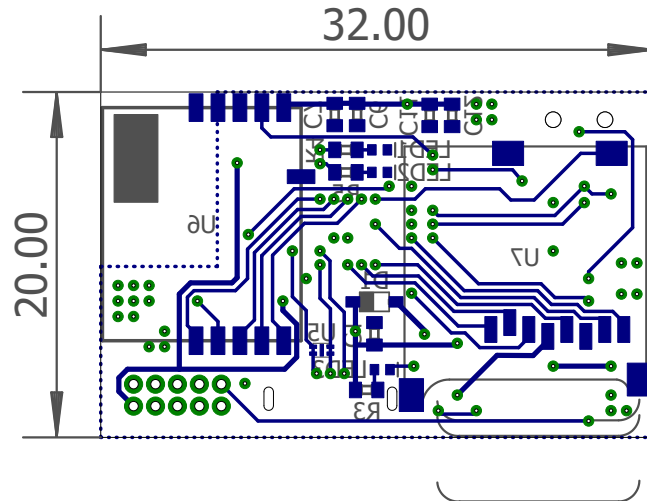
Bottom view of the Winter layout (units in millimeters).
